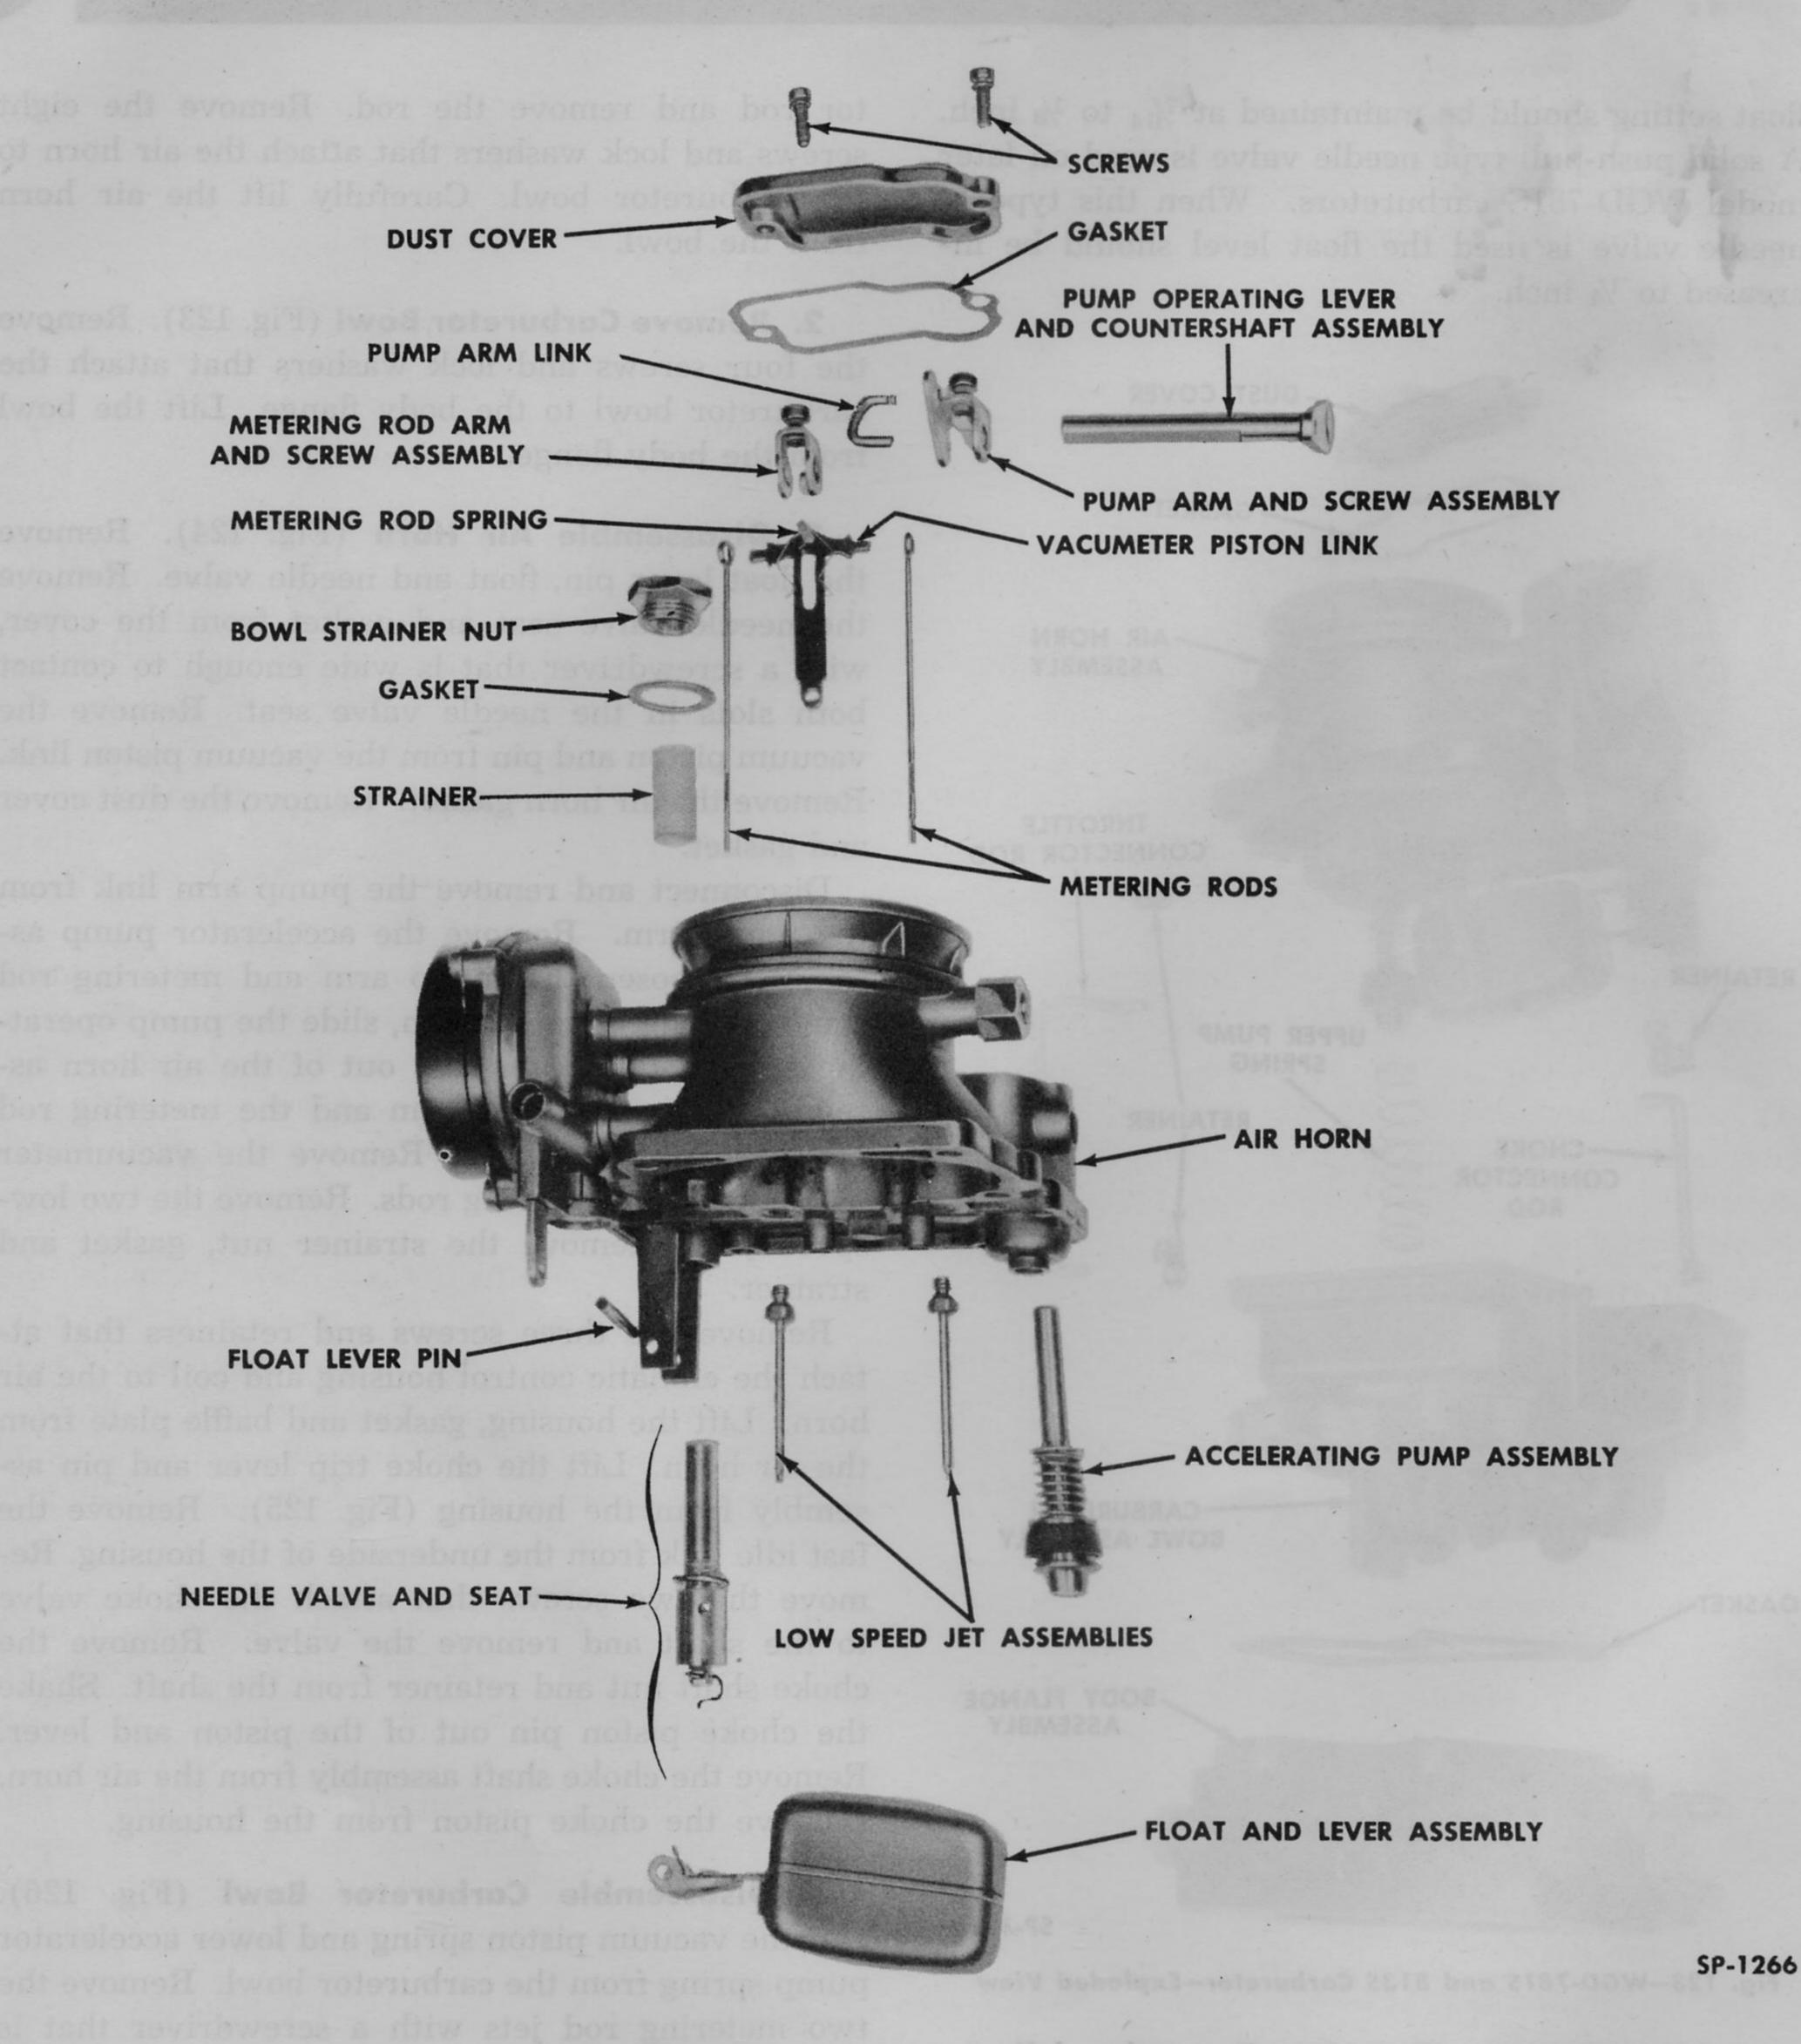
Air Horn—Exploded View (WGD—7815 and 8135)
